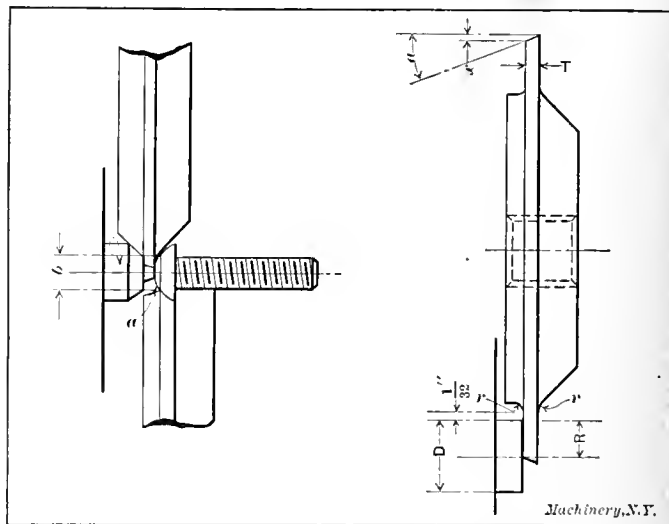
Spherical Screw Head formed by Combination of Forming and Cut-off Tools
